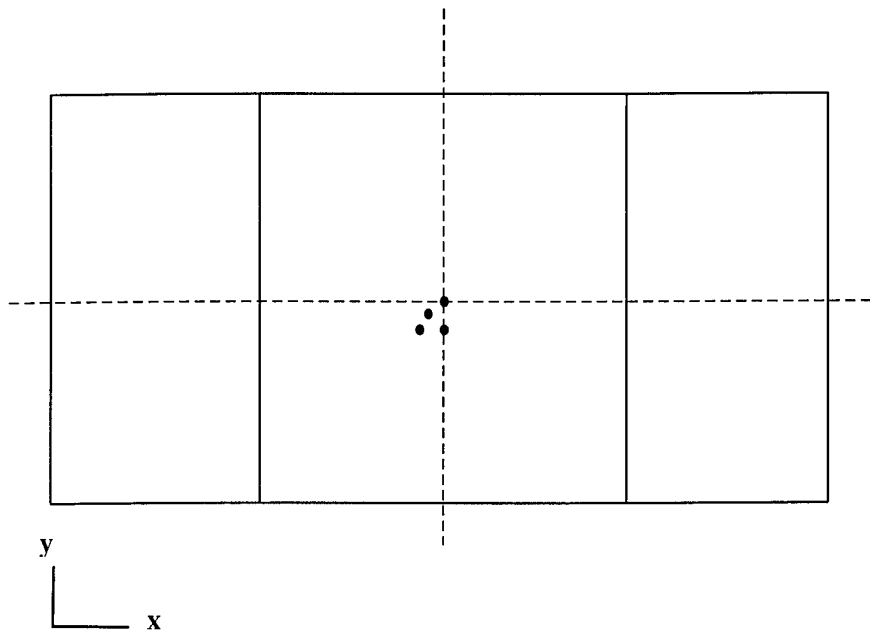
Location of possible cracks detected with laser ultrasonics. These possible crack locations could not be confirmed by any other method.
